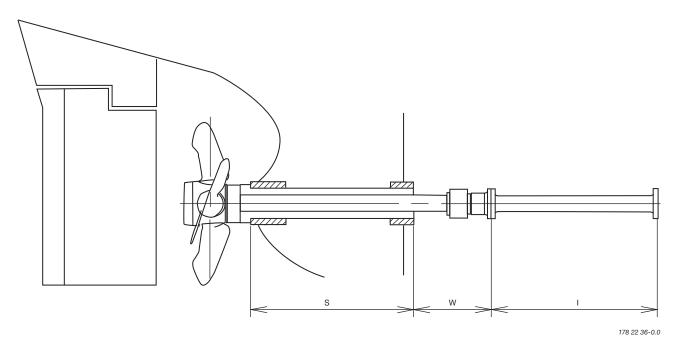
Dimension sketch for propeller design purposes
